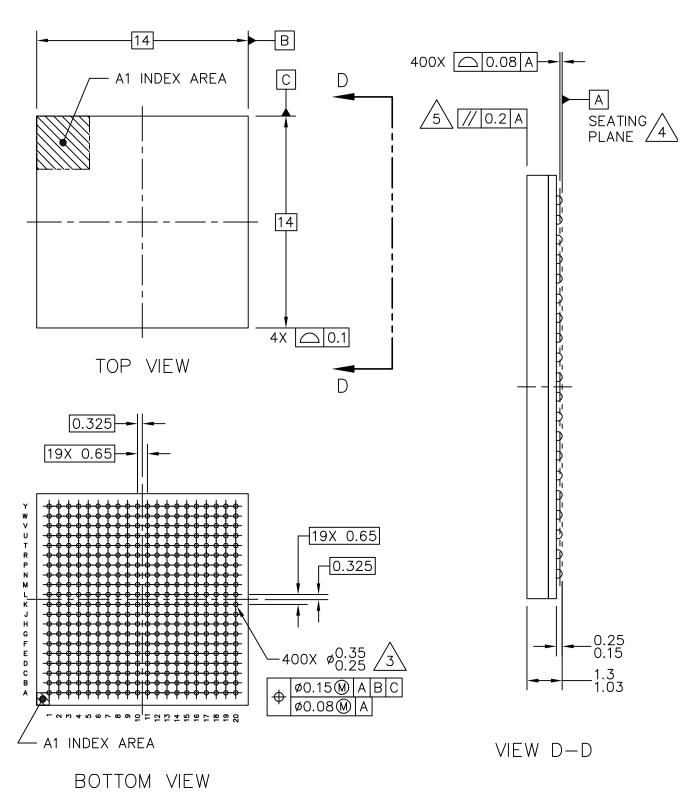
14 x 14, 0.65 mm BGA Package Top, Bottom, and Side Views
